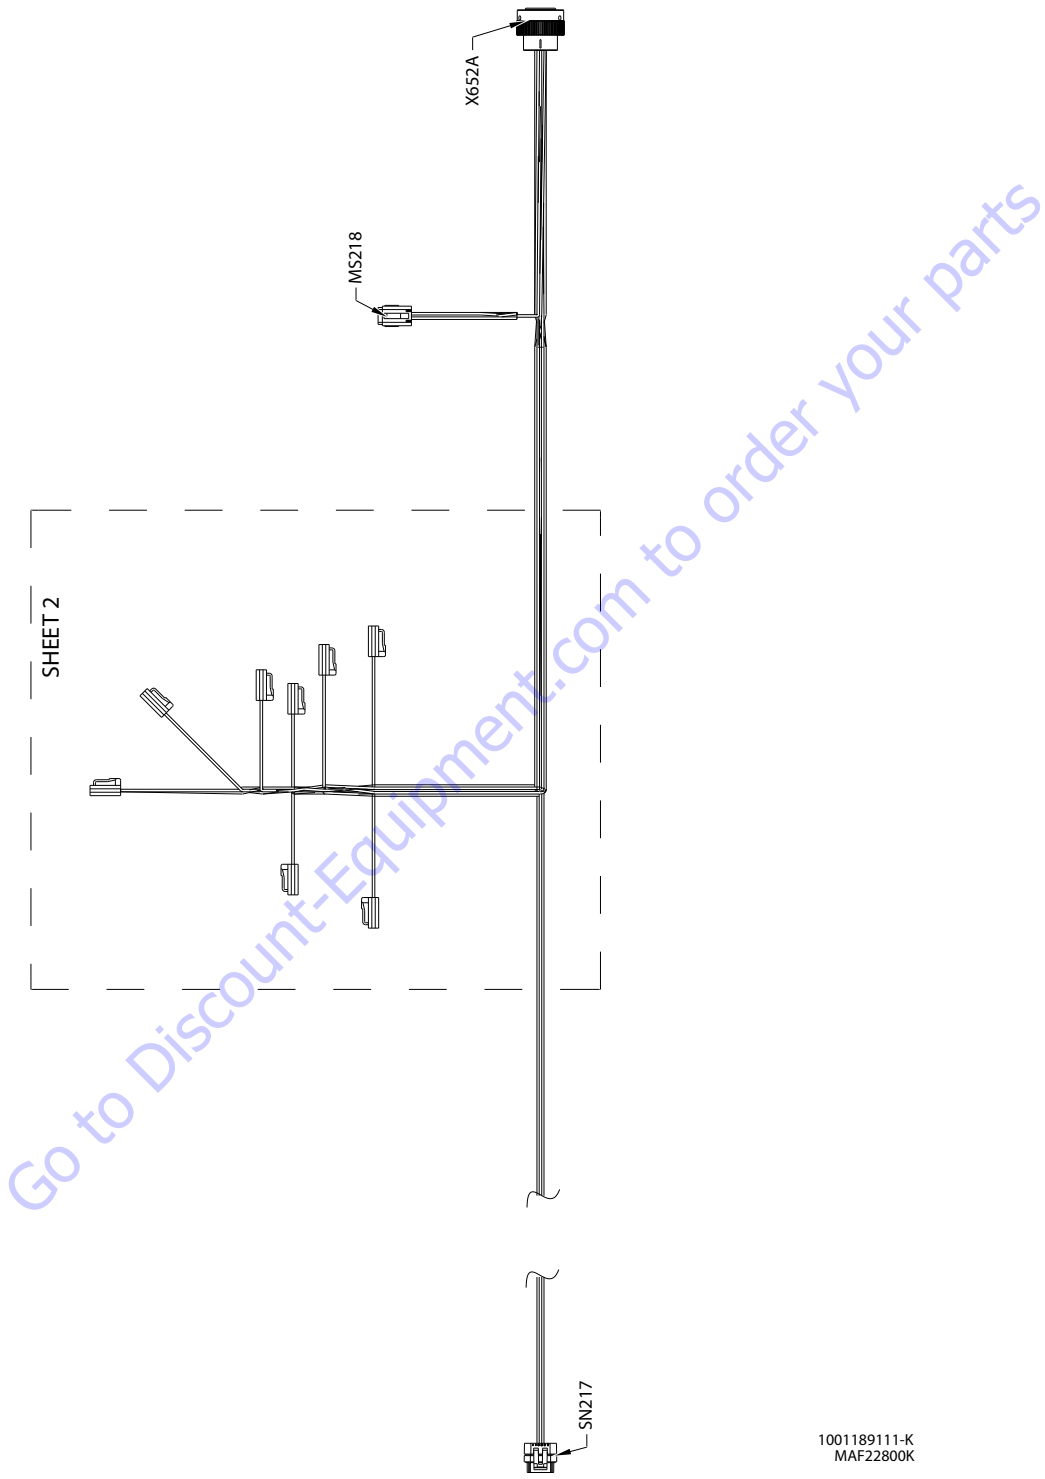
Platform Valve w/Jib Harness - Sheet 1 of 3
